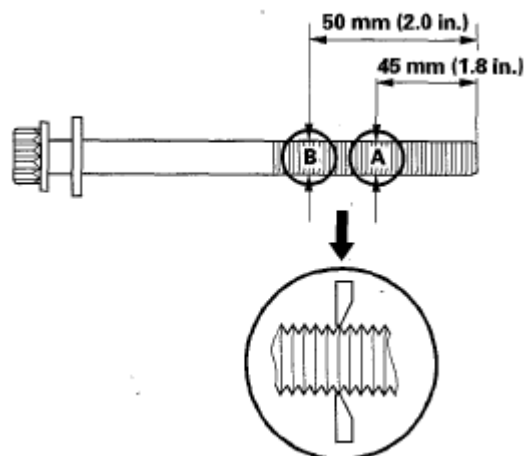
Measuring Diameter Of Cylinder Head Bolt
